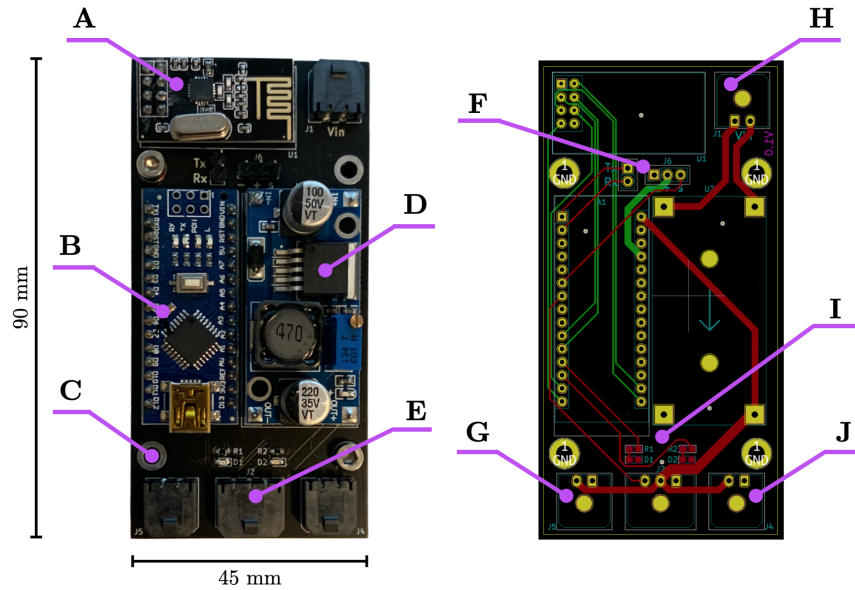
Quick Connect PCB: (Left) Assembled Board, (Right) Board Layout with Hidden Fill Zones
